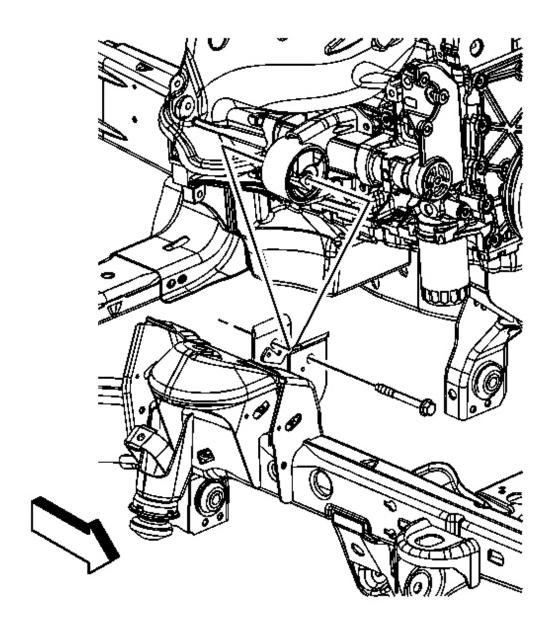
Identifying Right Engine Mount-To-Frame Bracket Bolt Courtesy of GENERAL MOTORS CORP.
